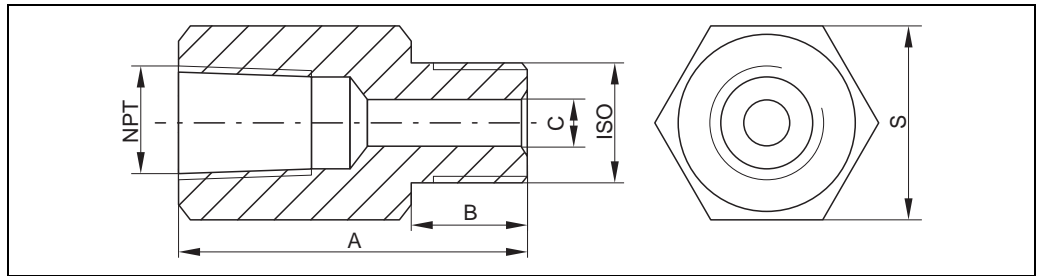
Dimensions of Adapter NPT inner thread on conical ISO external thread
